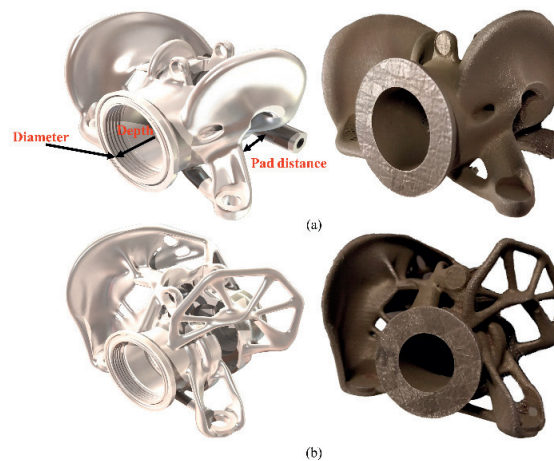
A geometry comparison between the CAD models and the 3D printed parts of the housings: (a) The front housing and (b) The rear housing.
